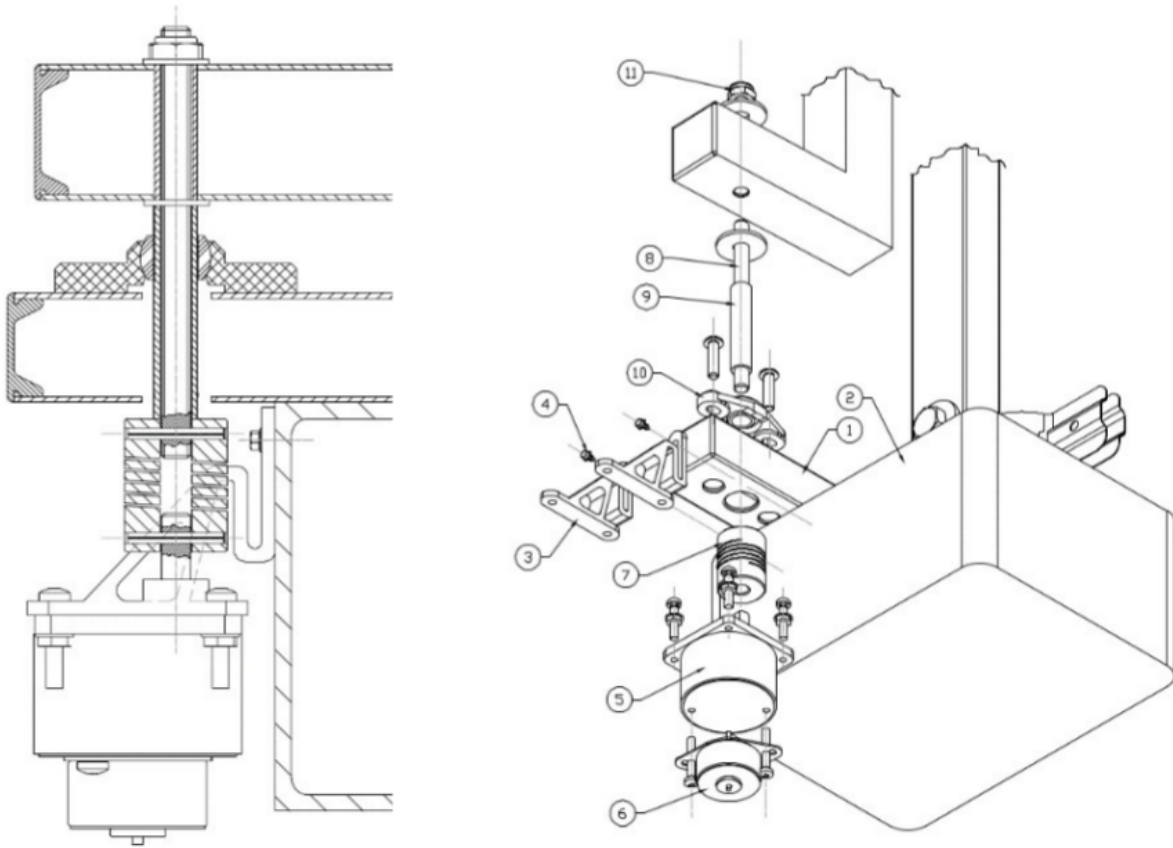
Figure 3-23 Engine and second reducer mounting representation
